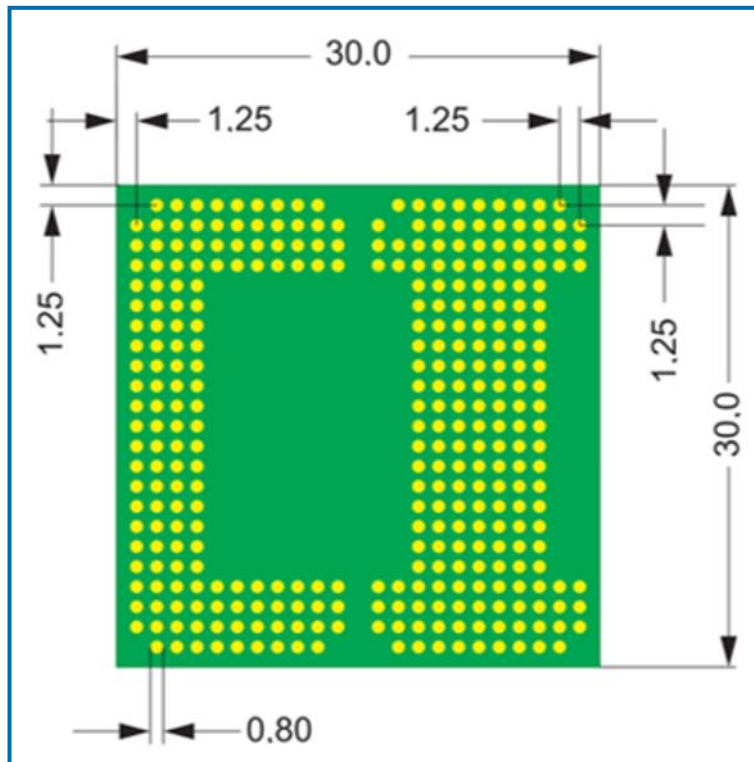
Dimensions of OSM S.i.MX8M Mini (top side view)
